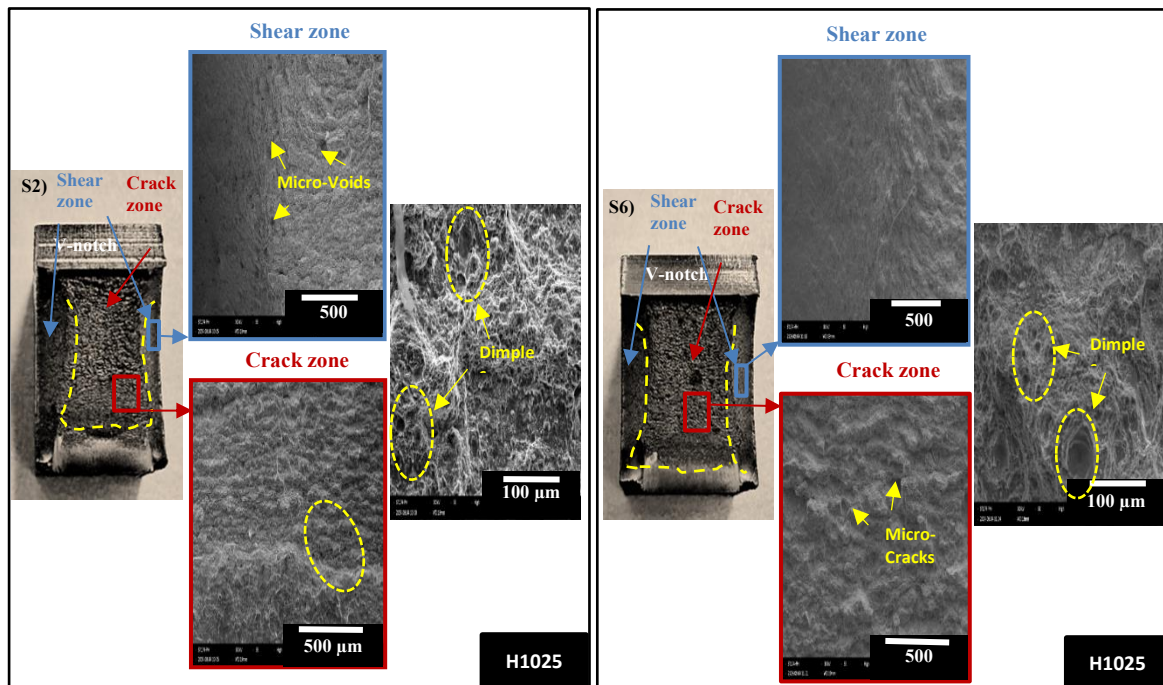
SEM fractography of Charpy impact fracture surfaces of 17-4 PH stainless steel specimens aged at H1025. (a) Specimen S2, (b) specimen S6.
